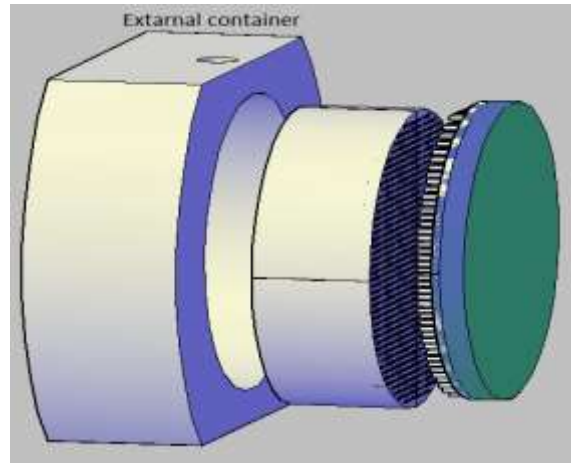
The complete mold is designed for silicone layer synthesis. There is a hole in the upper part of the external container which is special for soft liquid polymer injection
